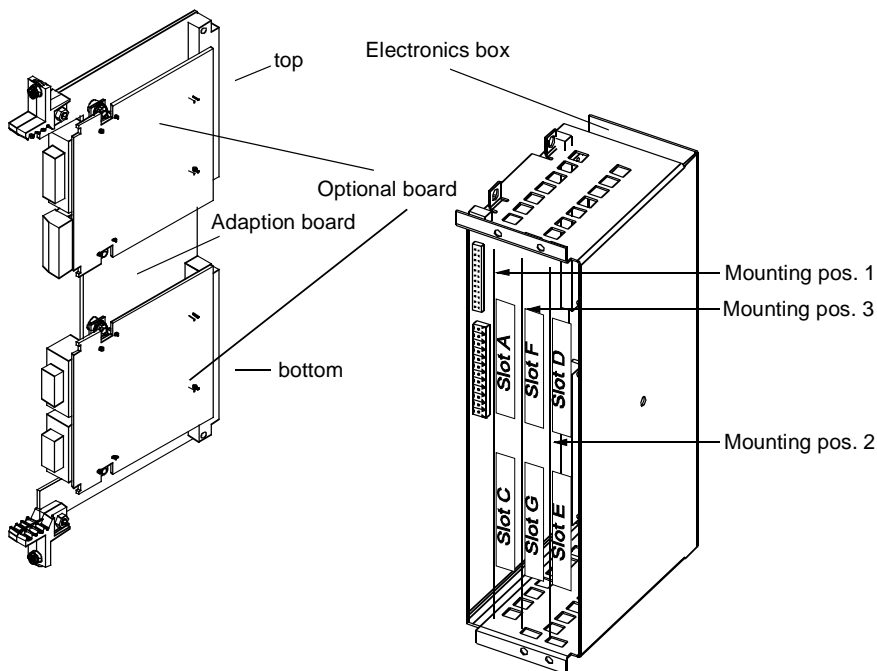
Adaptation board with optional boards and position of the slots for Compact units and chassis-type units
